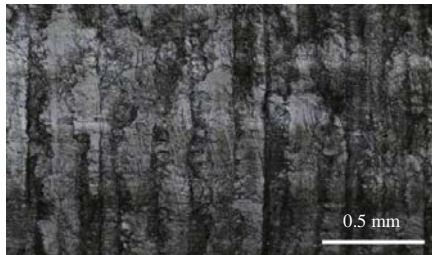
Workpiece surface after forming with T3dry ($v_f = 500$ mm/min).
